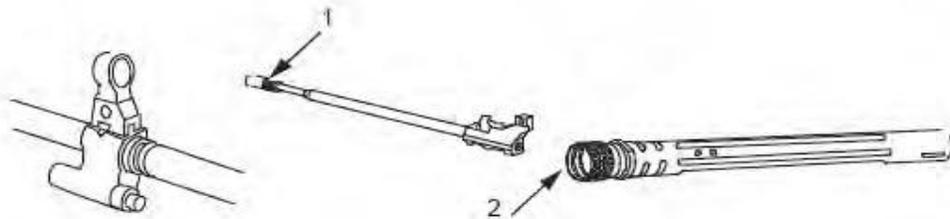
Mono-block Barrel, Gas Cylinder, and Piston Assembly..
